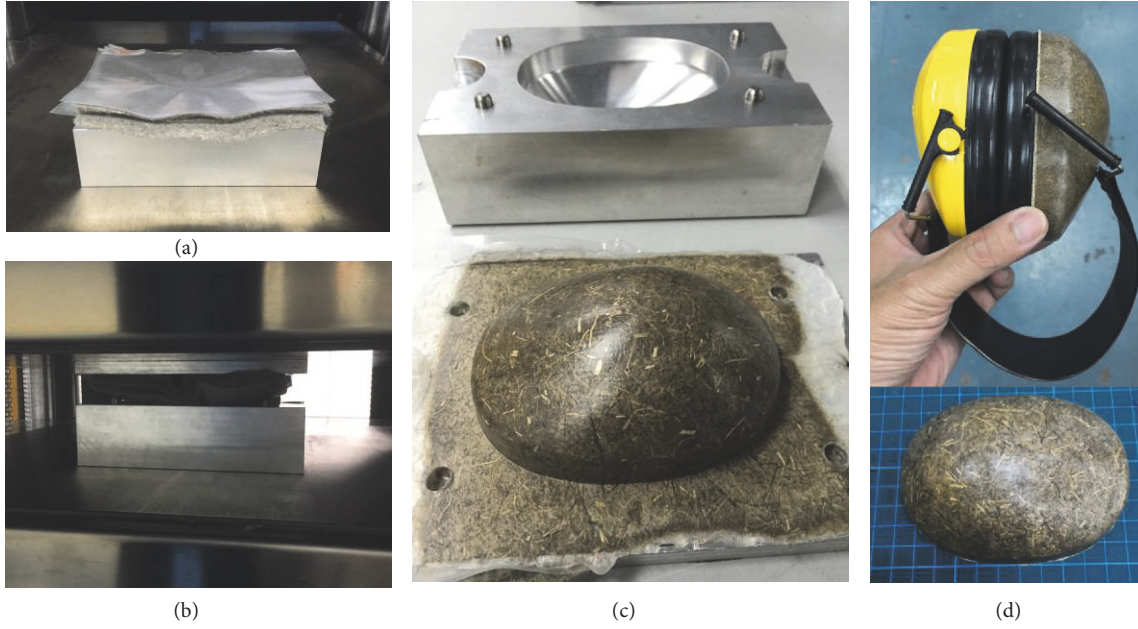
Manufacturing process of the composite ear cups: (a) a stack of flax fabrics and polypropylene films placed on top of one side of the two-piece aluminium mould; (b) hot press compression moulding; (c) unprocessed composite ear cup; (d) processed composite ear cup (bottom image) and assembled earmuff for experiment (top image).
